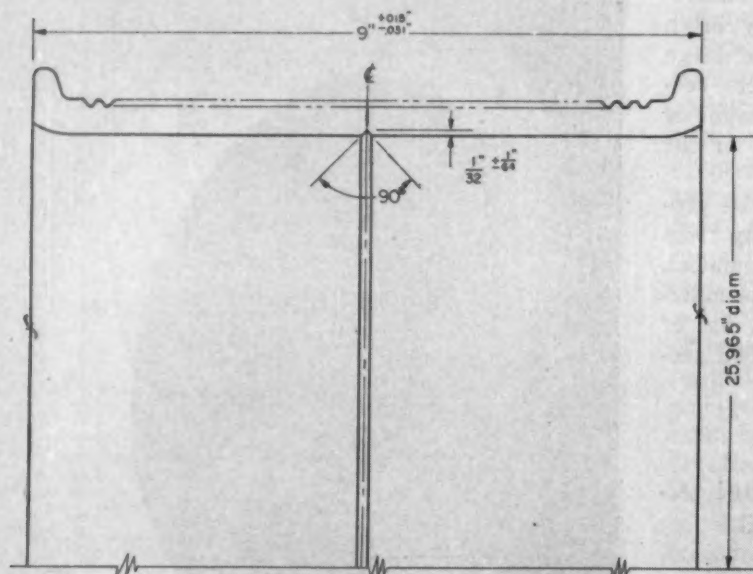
Tank bogie wheel, rolled and flash welded to final dimensions from a special SAE 1035 steel section
